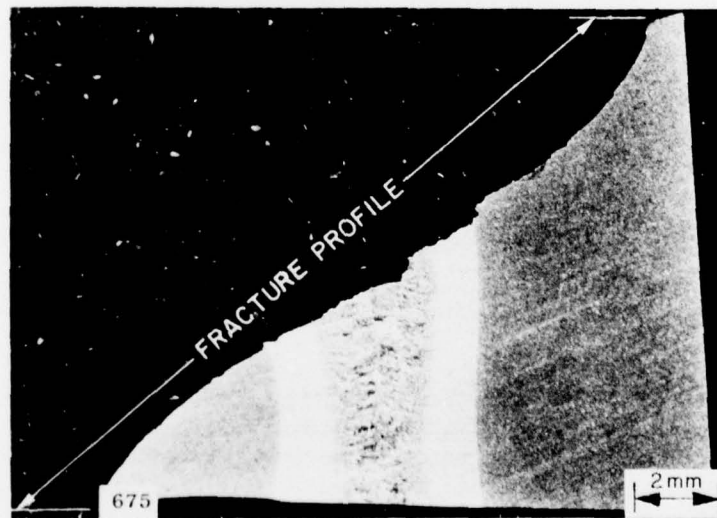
Pop-in region of fracture in 12.7-mm-thick base metal DT specimen.
